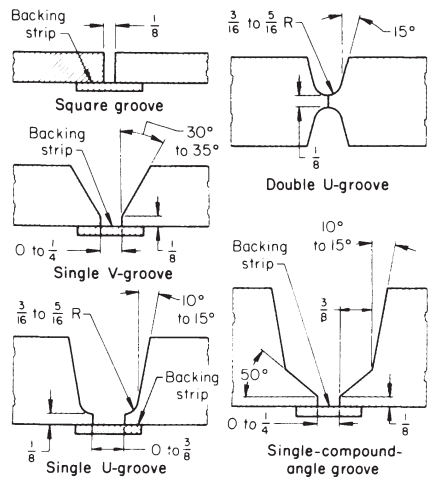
Typical dimensions for SAW of nickel alloys. Backing strips are optional with zero root openings. Dimensions given in inches
